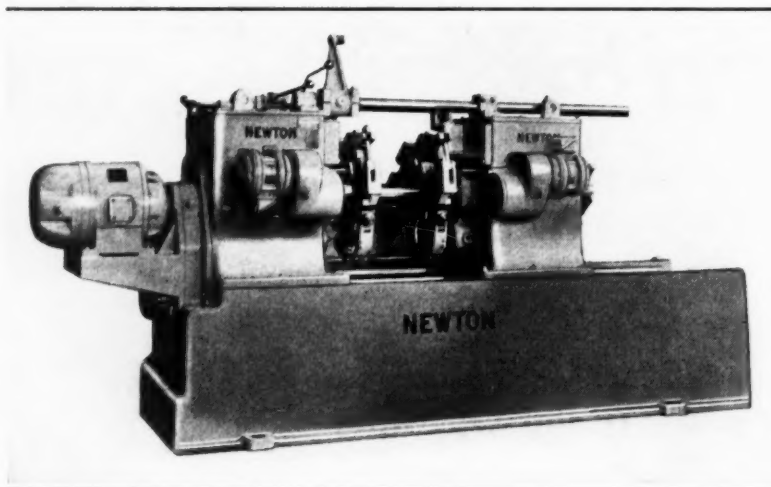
Newton Drum Type Machine for Face-milling and Center-drilling the Ends of Shafts
